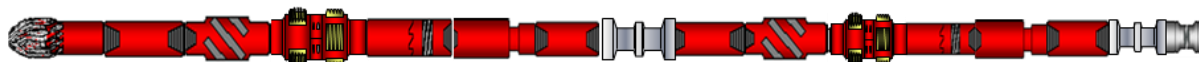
A Typical Wellbore Cleanup Bottom Hole Assembly
